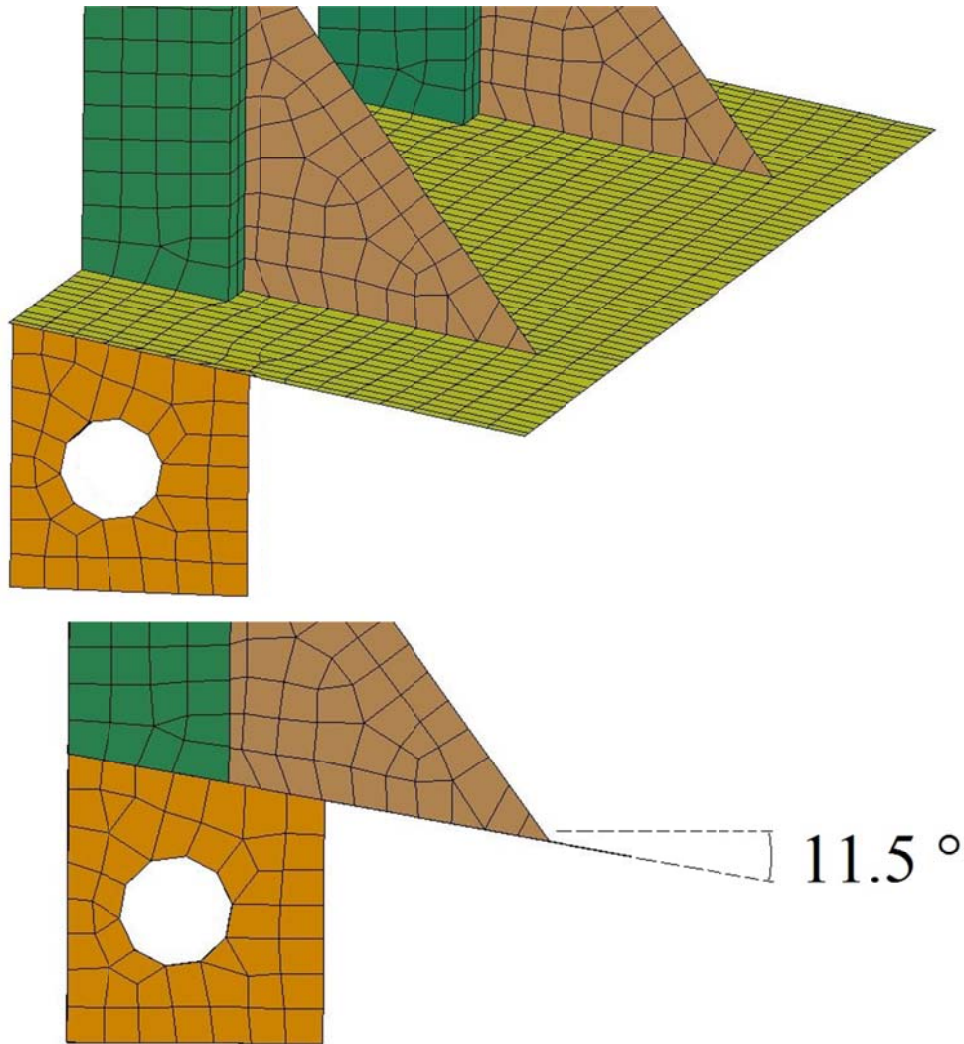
Redesigned Cable Release Lever, Angled Base Plate
